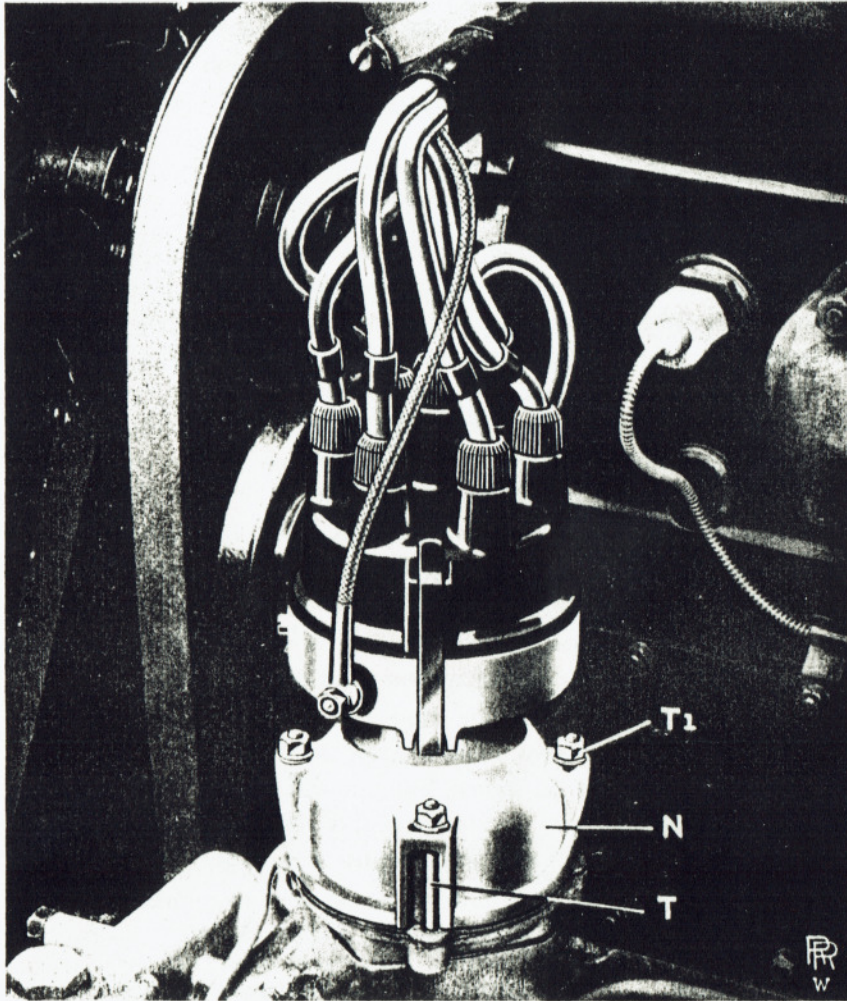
CONTACT BREAKER AND HIGH-TENSION DISTRIBUTOR.
